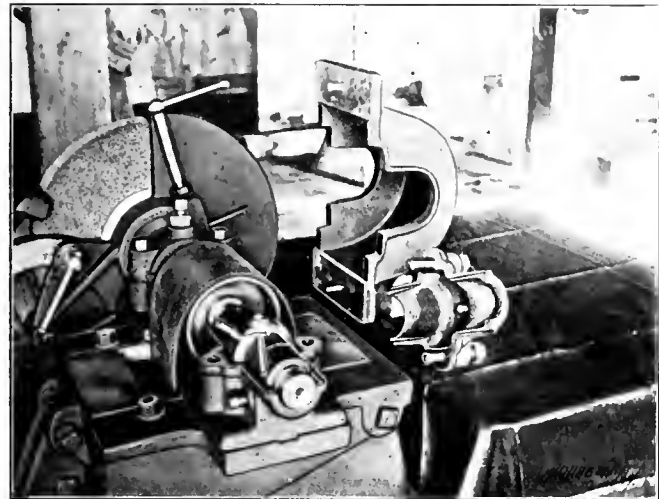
Belt-cover, Bearing Cap, and Upper Half of Box removed.
